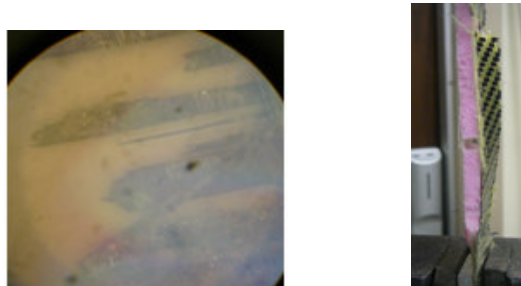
Left: Fractured Carbon Saw tooth (10x); Right: Sample after test
